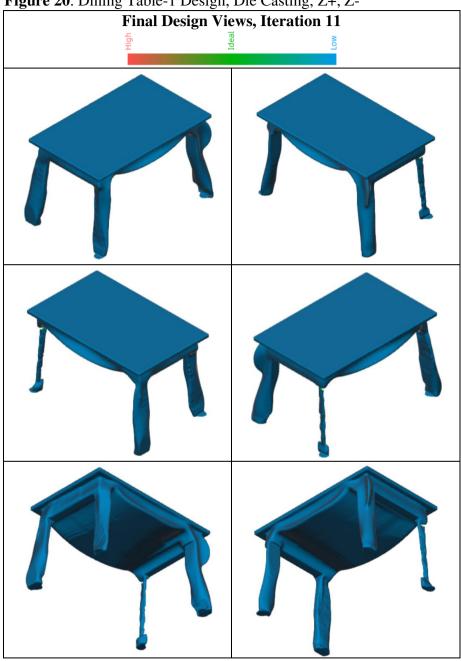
Dining Table-1 Design, Die Casting, Z+, Z-
